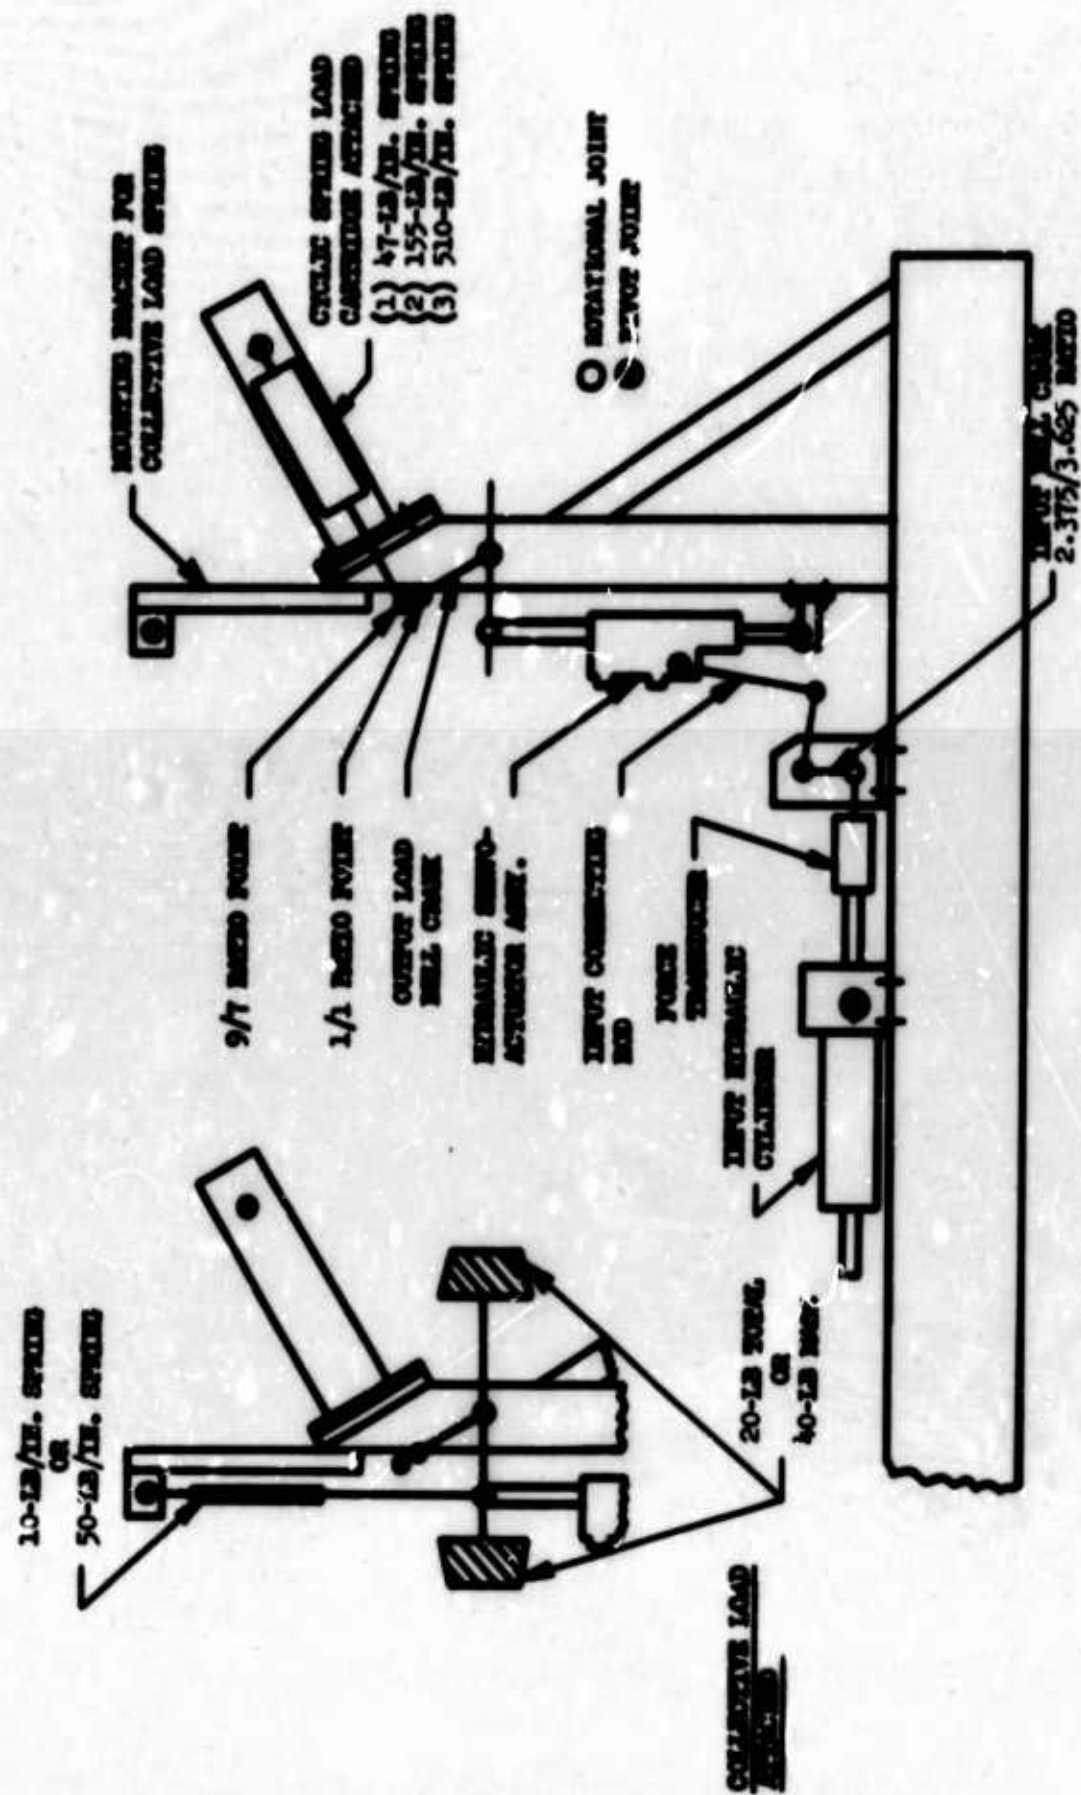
SCHEMATIC DIAGRAM - HYDRAULIC SERVO INSTALLED IN TEST FIXTURE
